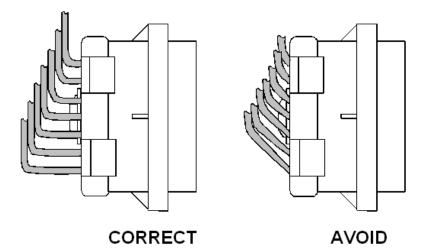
Example of Wire Harness Routing at the ECM Connector
